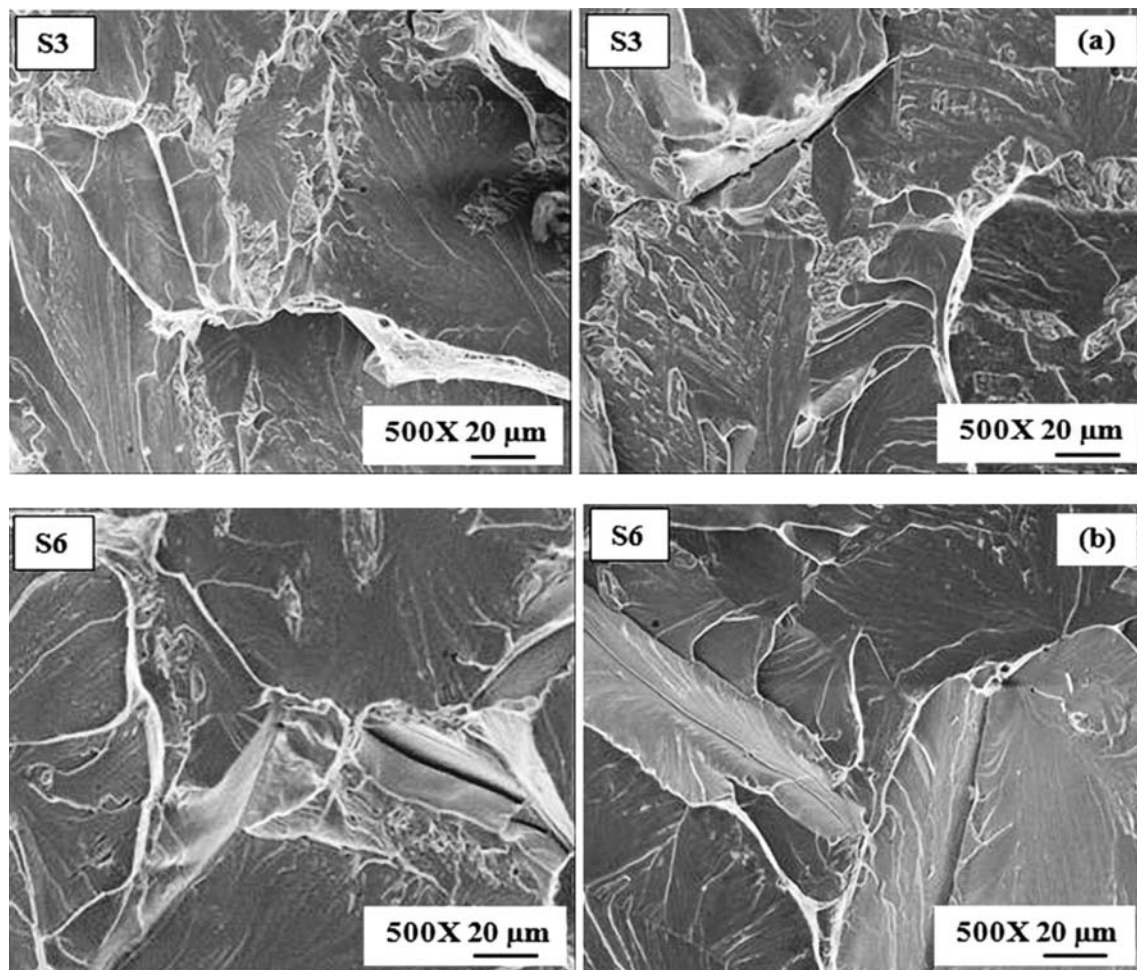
SEM micrographs of fracture surfaces after notch impact test of welded samples: a) S3, b) S6.
